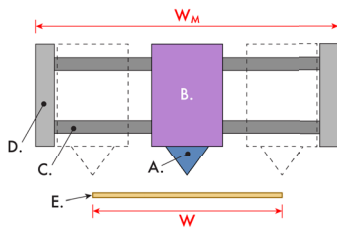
A canonical positioning stage: a toolhead (A) is attached to a carriage (B), that runs on guides (C) supported by machine structure (D). Motion of the toolhead is limited to width (W) over a workspace (E), while the machine occupies a width of (W_M).
